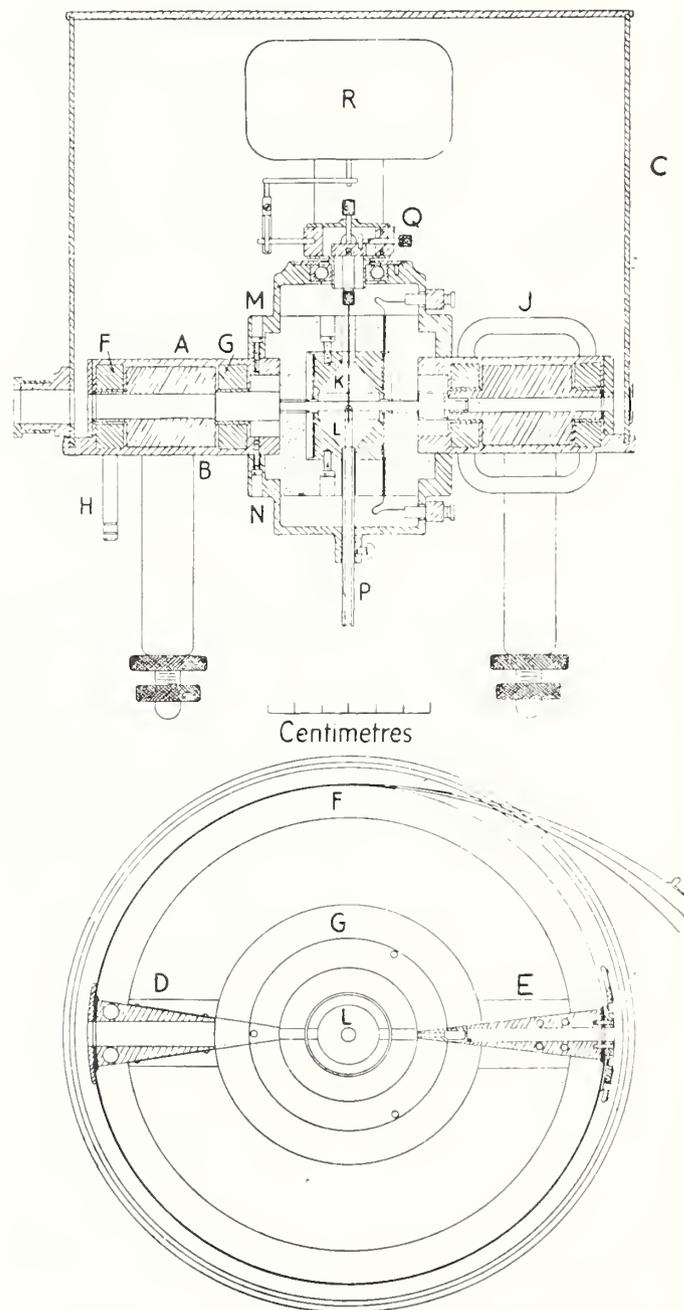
X-ray camera and auxiliary equipment (Wilson).
